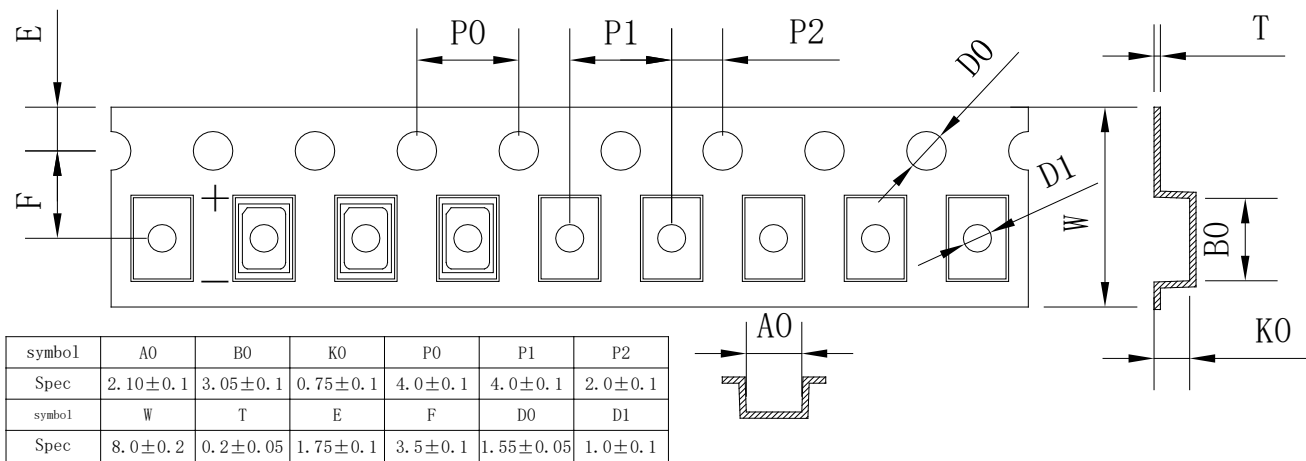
Carrier Tape Dimension œ¿C ?o?
